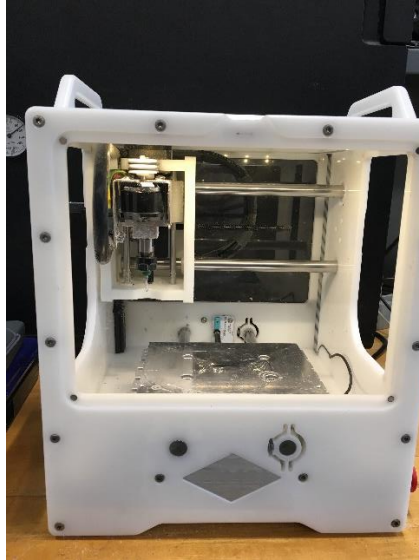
2 Othermill CNC machine used to machine the microchannel out of PMMA sheets.
